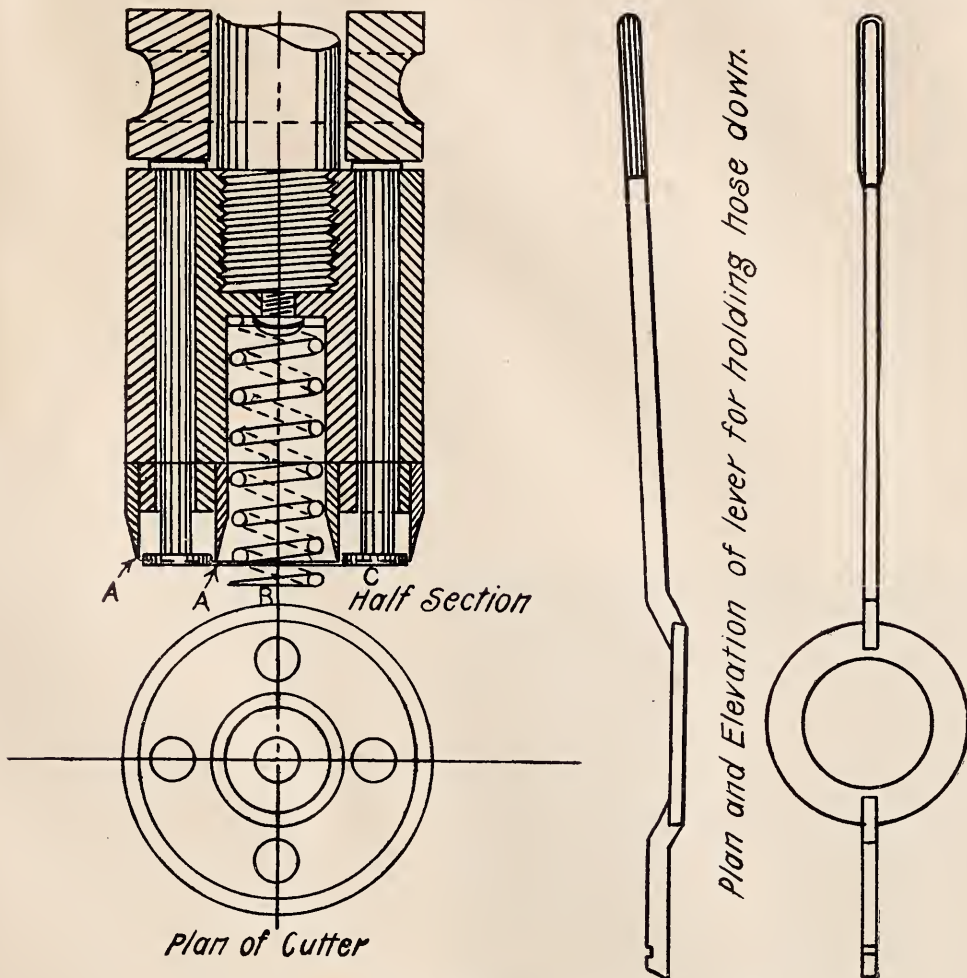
DETAILS OF RUBBER GASKET CUTTER.
